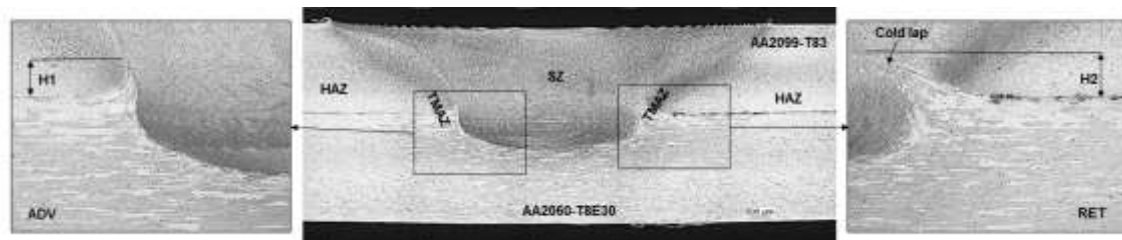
Cross-section of FSLW joint produced at 1200 rpm and 250 mm/min using a three flat + mixed thread tool.
